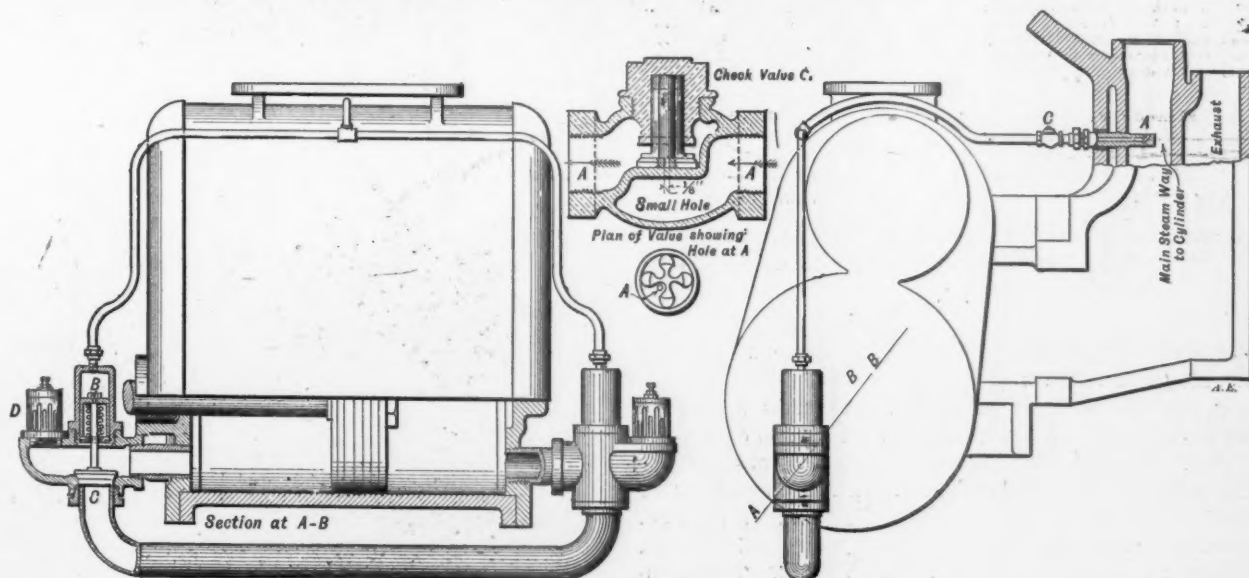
SECTION SHOWING ATTACHMENT TO CYLINDER.
